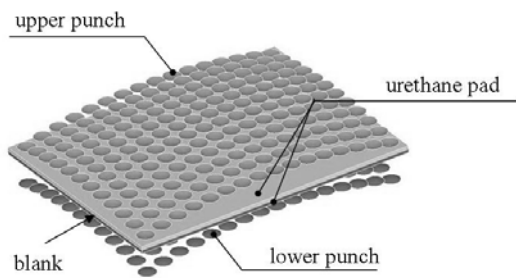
Numerical simulation model of flexible forming process using thick plate forming machine model
